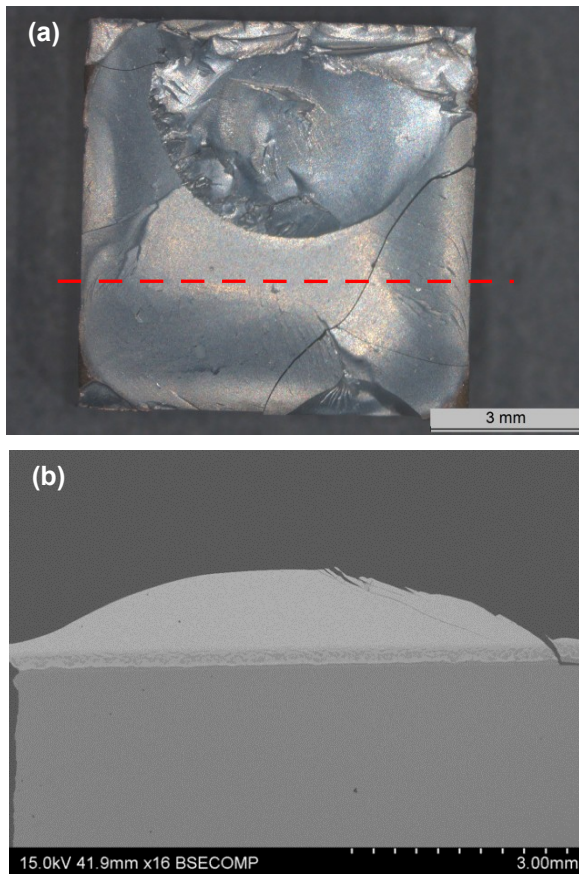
a) Stereoscopic image of the Eurofer fracture surface. b) Image of the fracture cross section following the dashed line.
